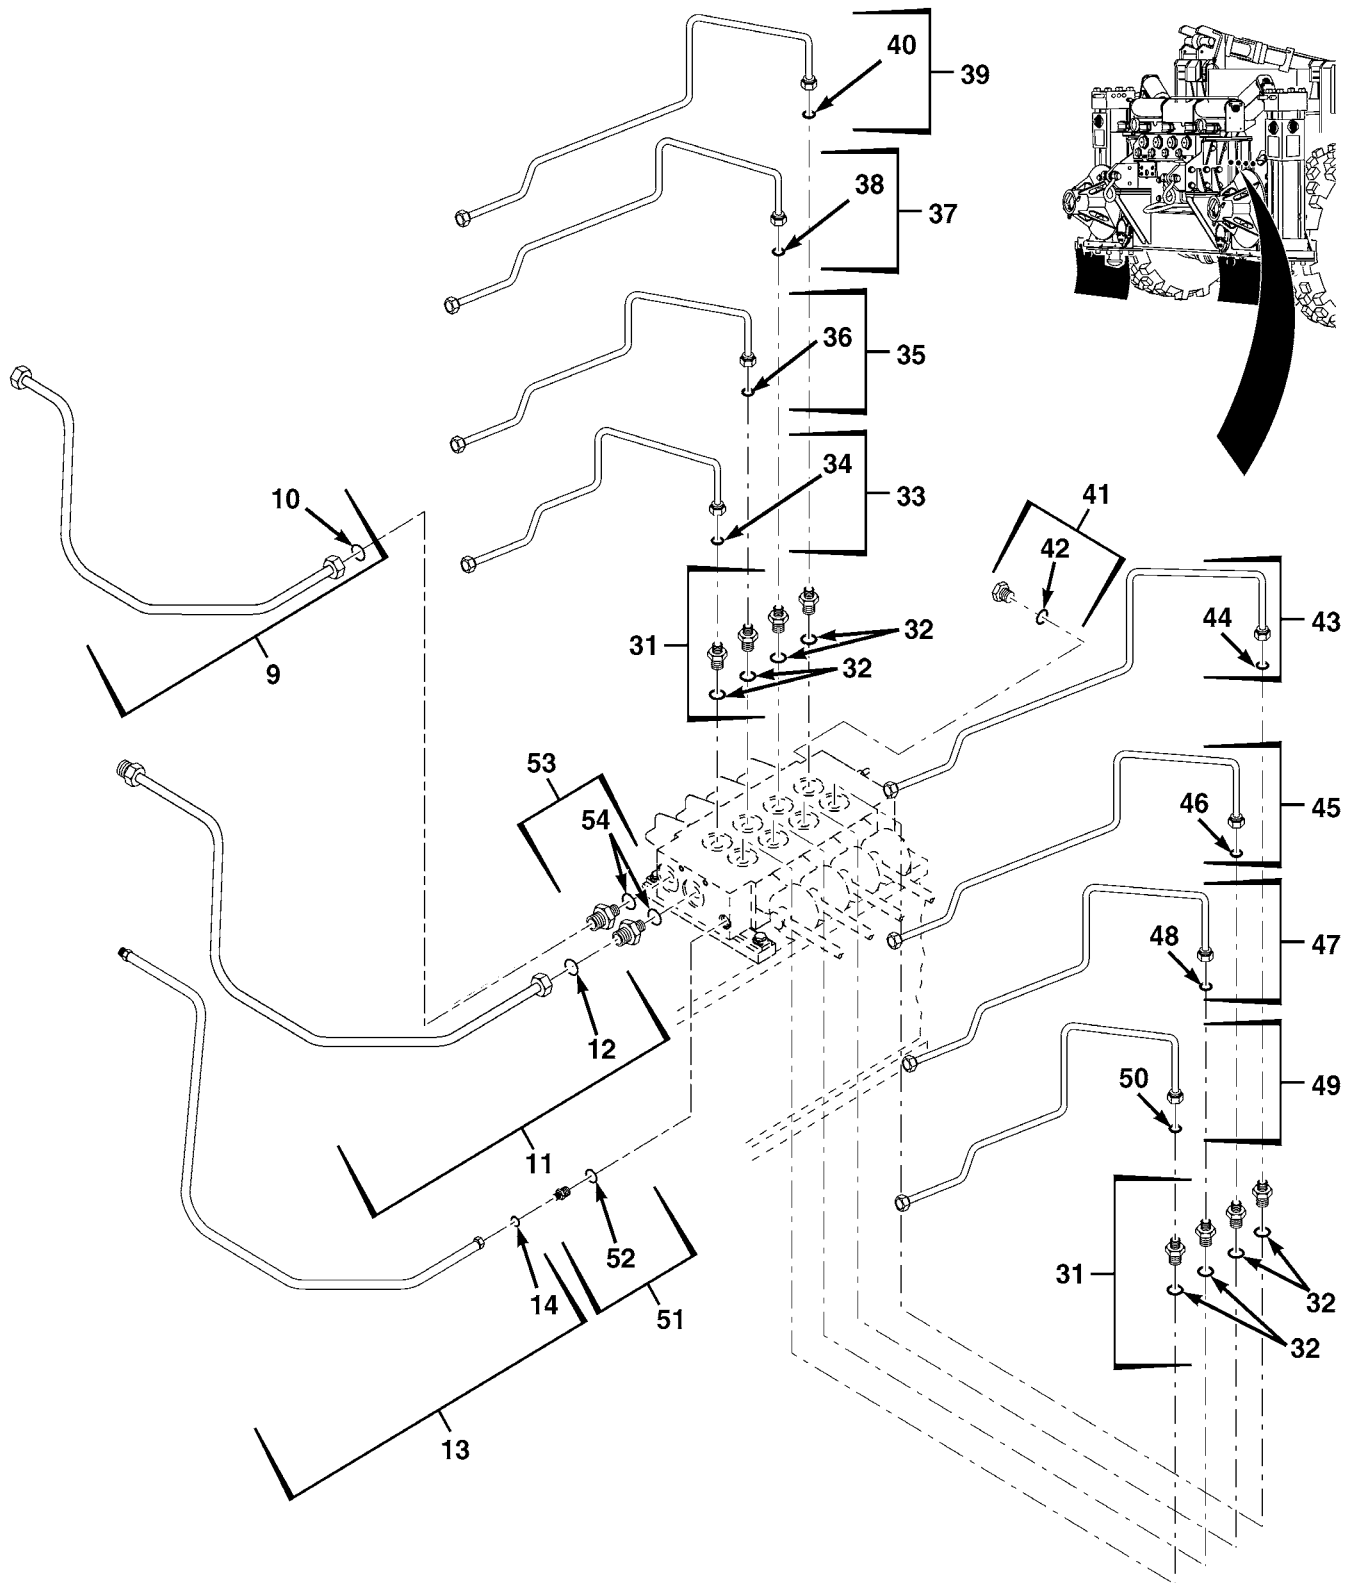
OUTRIGGER HYDRAULIC LINES AND FITTINGS (SHEET 2 OF 4)
